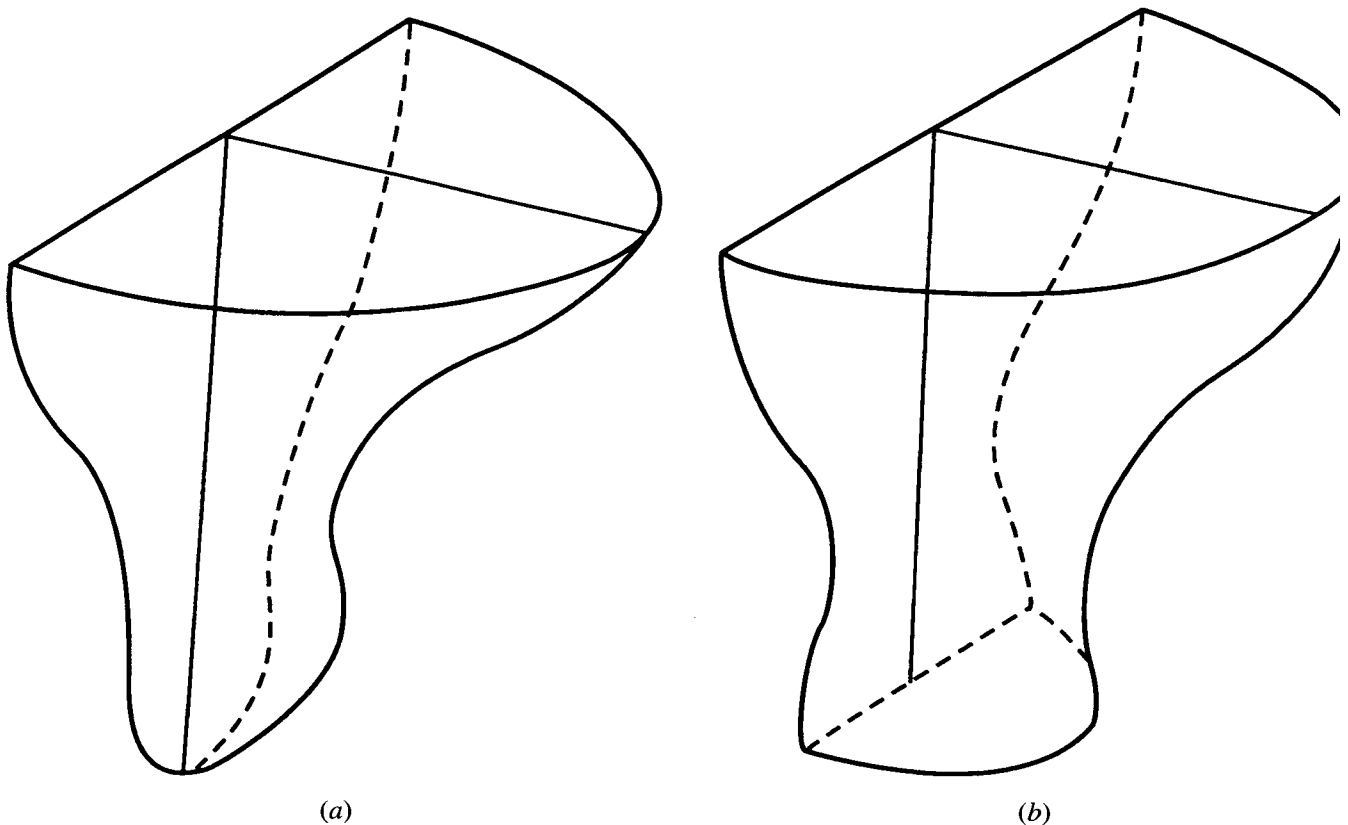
Schematic representation of the 3-D electron beam weld pool shapes: (a) partial-penetration weldment with a protrusion near the bottom of the weld and (b) full-penetration weld showing an enlarged weld pool at the bottom.
